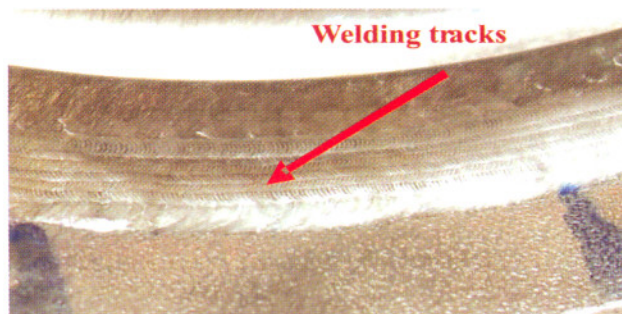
View of the end ring from inside after repair by fusing weld bead for small segment around.
